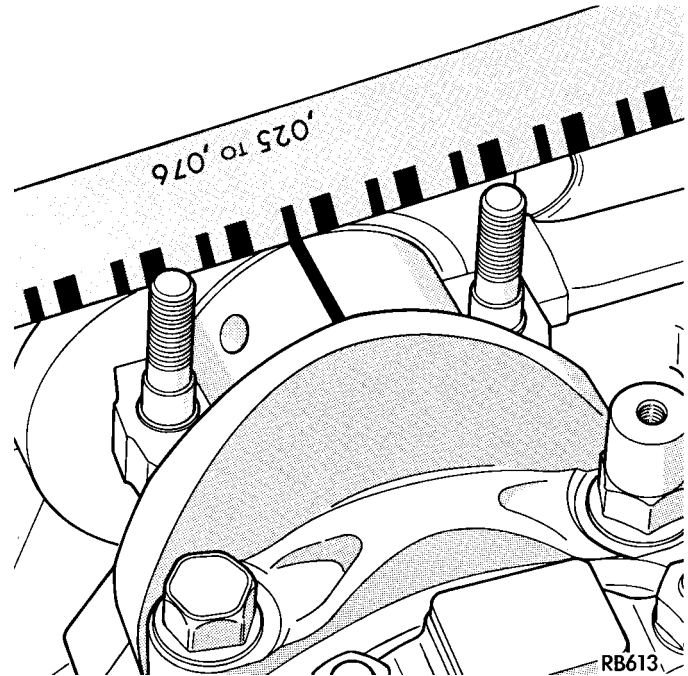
Checking Connecting Rod Bearing Clearance—Typical
